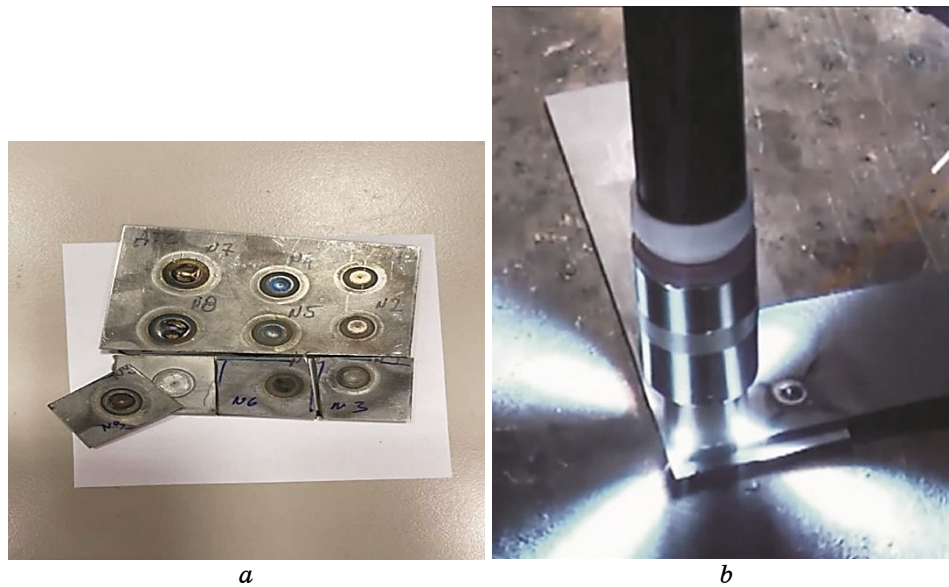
Appearance of welded joints (a) and the process of argon-arc spot welding (b).
